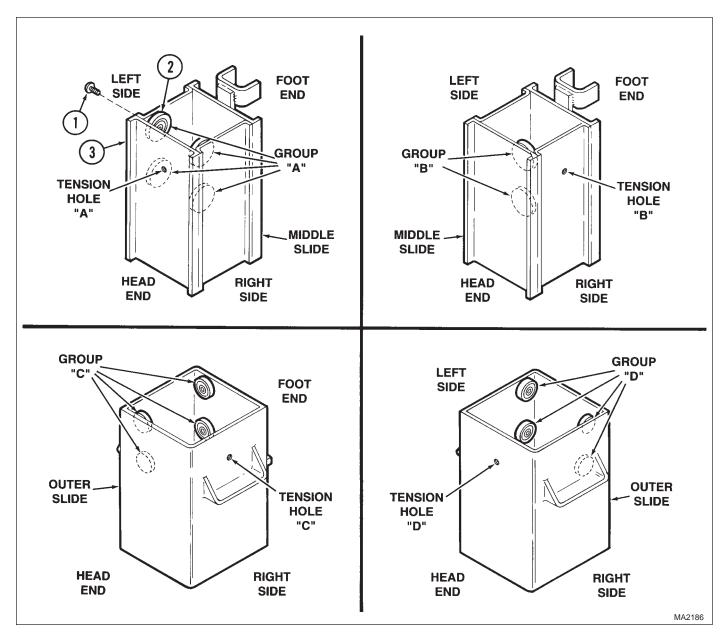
Eccentric Bearing Removal / Installation / or Adjustment Use this illustration for units with Serial Numbers DN1000 thru DN1031
